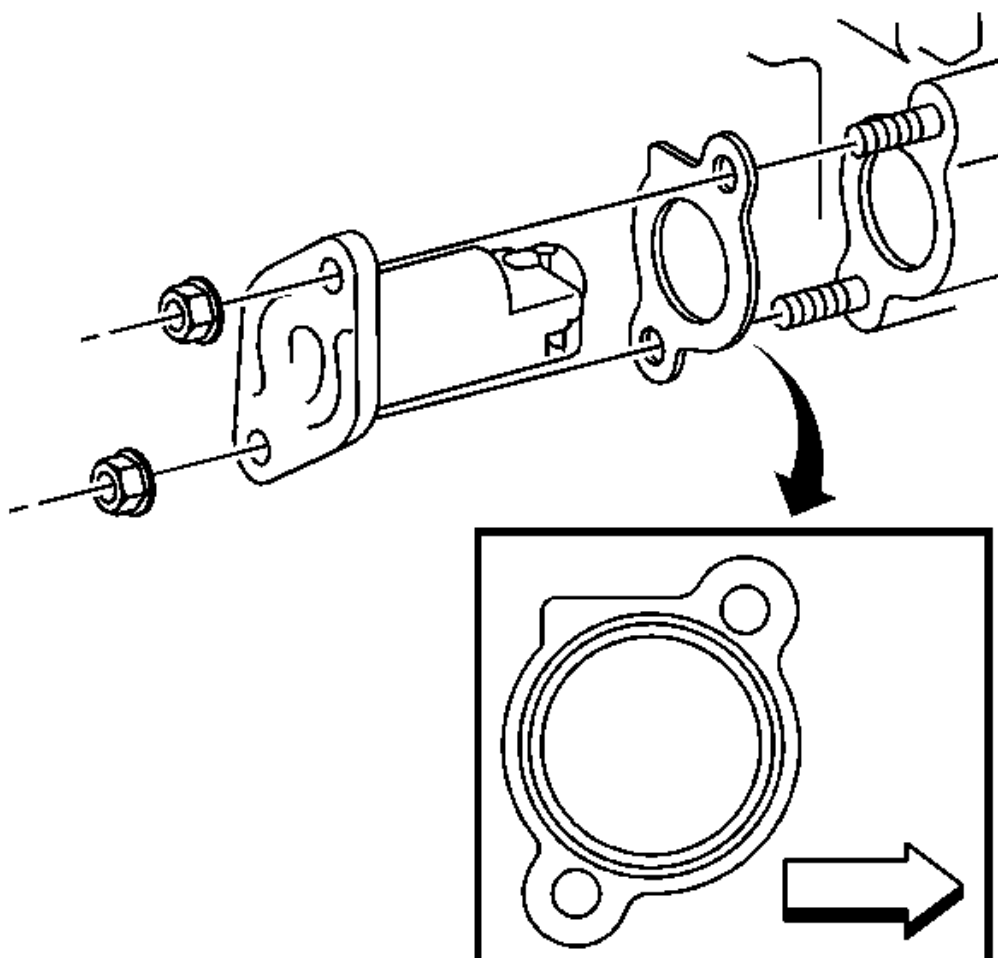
View Of Gasket, Chain Tensioner & Nuts
